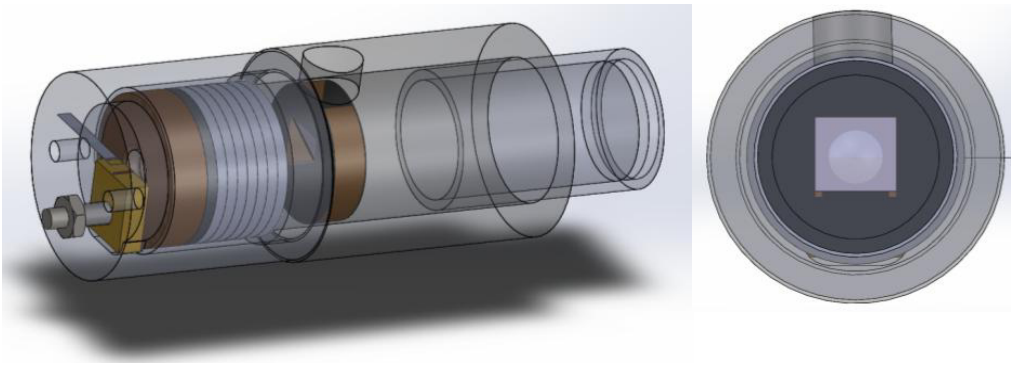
Shows a projection of the assembled optics and an end view into the optics.
